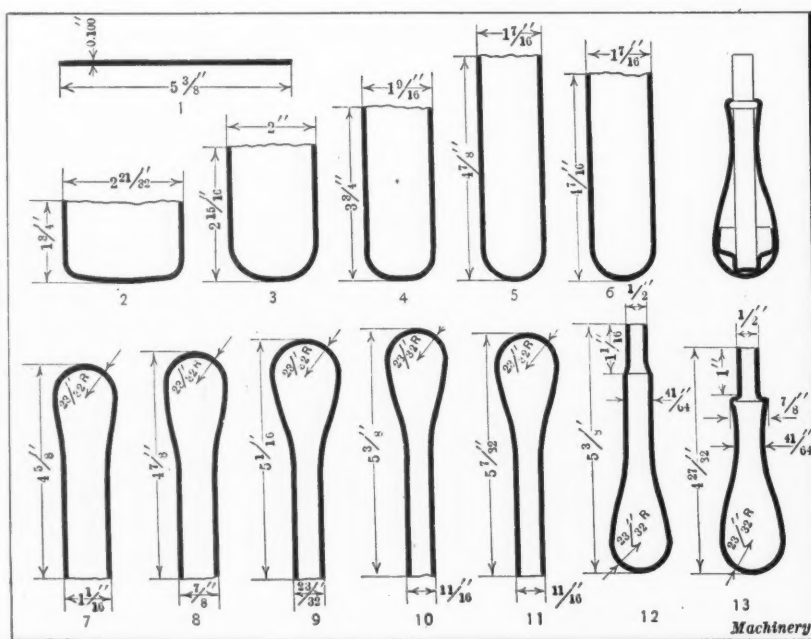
Sequence of Operations in making a No. 7 Pressed-steel Machine Handle
